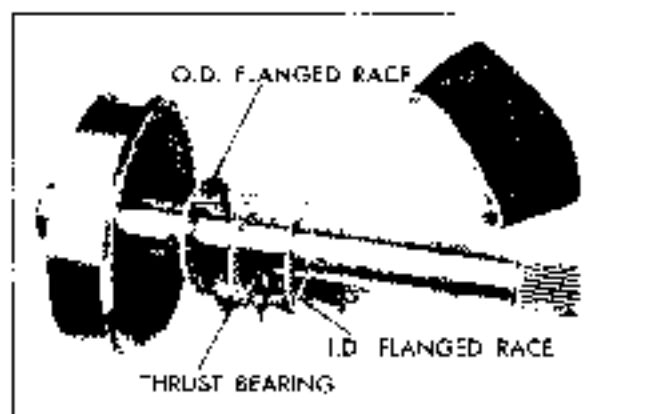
E-127 Installing Rear Internal Gear to Sun Gear Bearing and Races
